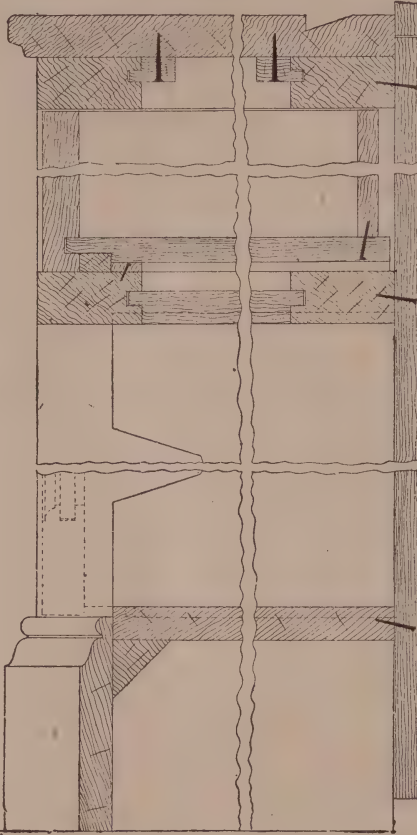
Enlarged Vertical Section through Lower Part of Dresser
